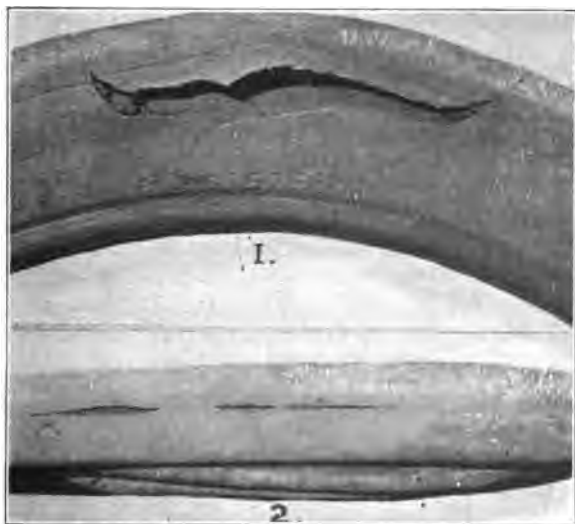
Tire defects. 1—loose tread. 2—buckle or mould pinch.
